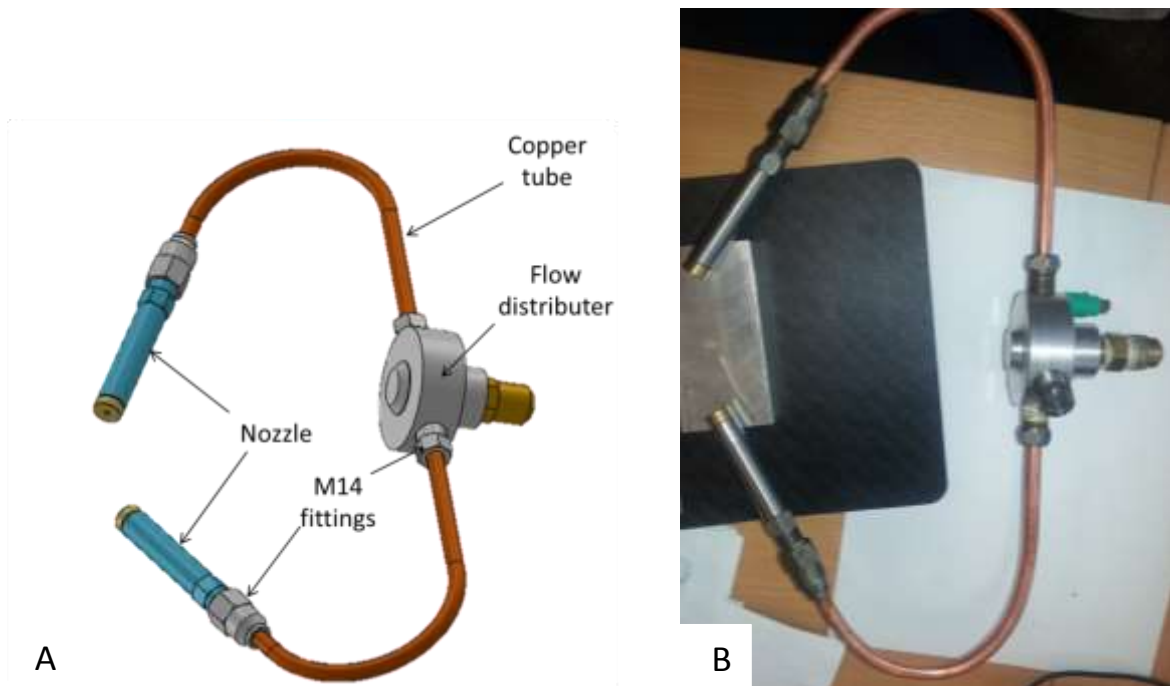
The dual-nozzle cryogenic cooling system used in this research. A) CAD model, and B) manufactured prototype
